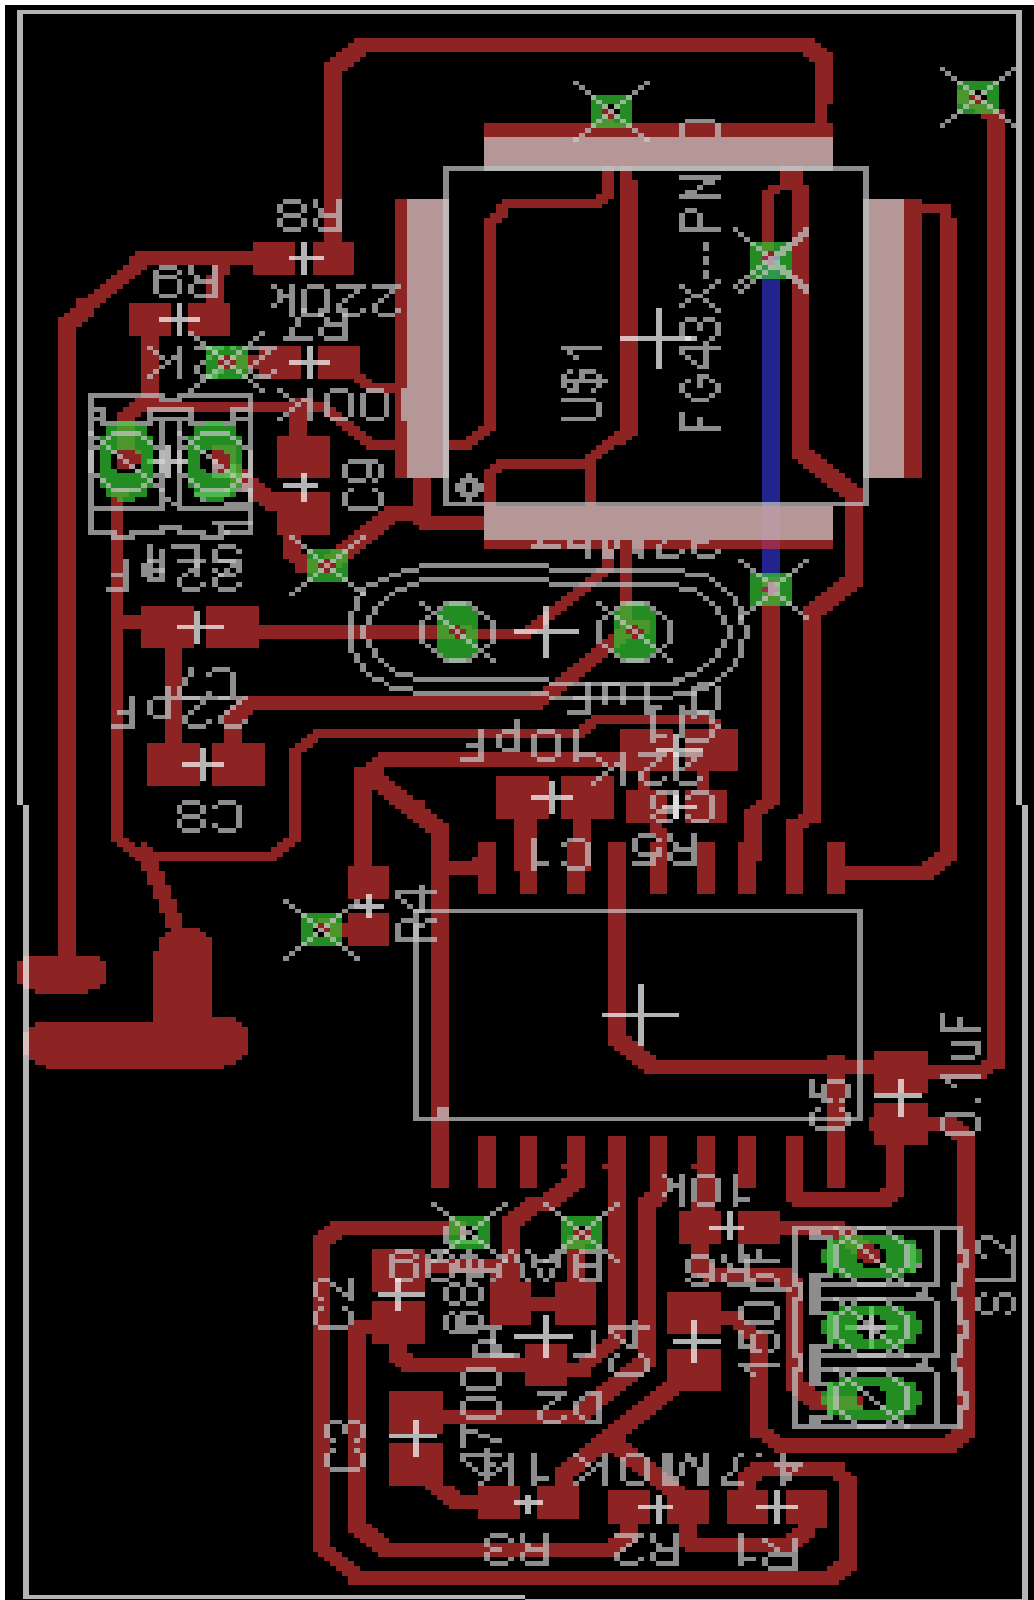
The PCB board file for manufacturing of PCB for the encrypted card reader
